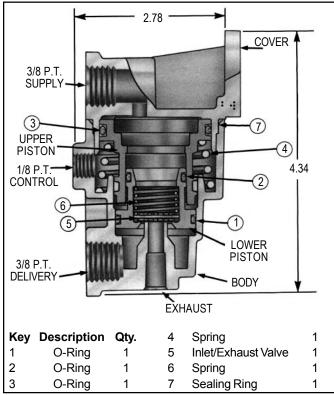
BP-1™ FRONT BRAKE PROPORTIONING VALVE CUTAWAY VIEW
